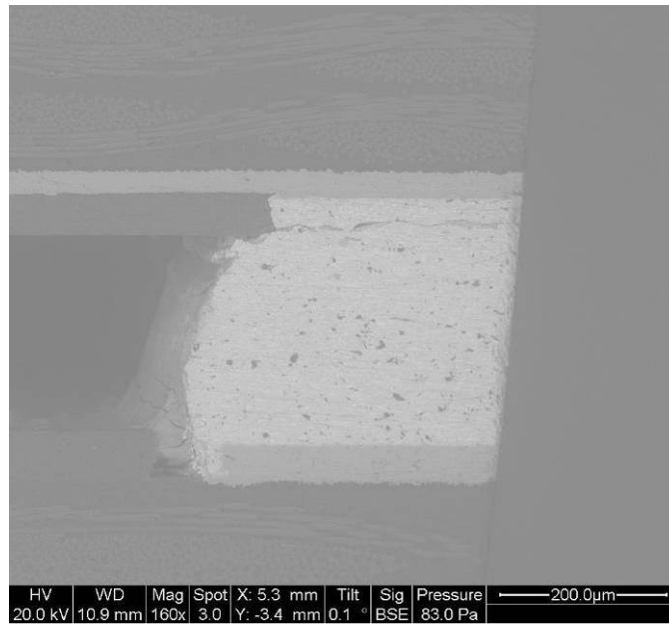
Cross section of corner SnPb solder ball, component U4, ball P2
